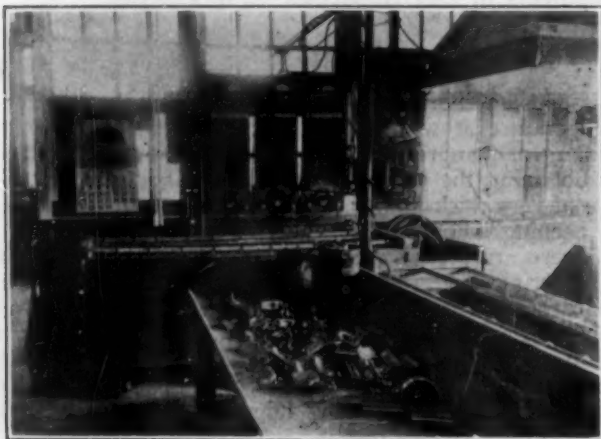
BENCH FOR WIRING CAR TRIMMINGS
